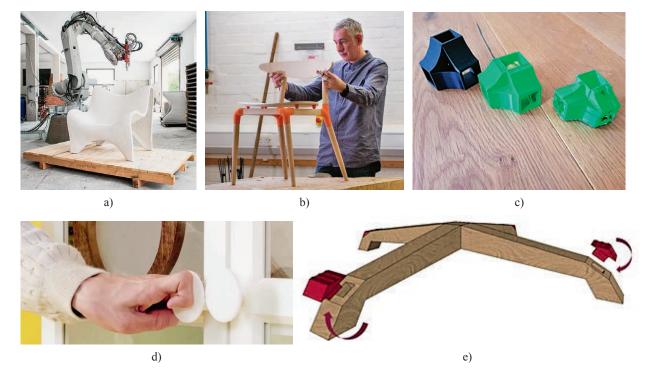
Uses of 3D printing in production: a) 3D printed large scale chair (https://parametrichouse.com/3d-printed-furniture/); b) Part of furniture (https://ultimaker.com/learn/3d-printing-in-furniture-design); c) Joints development (Prekrat, S., photography); d) Parts for testing of ergonomy (https://3dprinting.com/3d-printing-use-cases/how-the-furniture-industry-benefitsfrom-3d-printing/); e) Replacement of parts (Jarža, L., photo of rendered 3D model)
